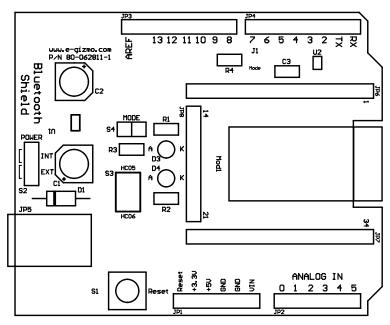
Bluetooth Shield PCB (silkscreen layout)
